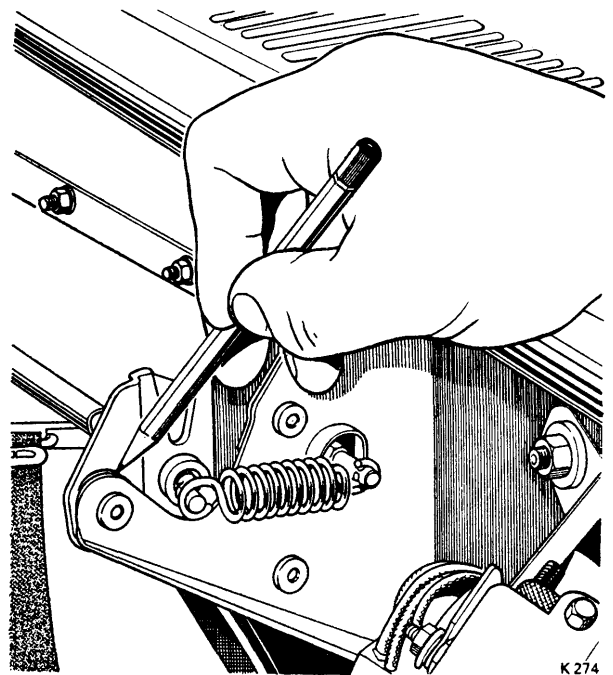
SCRIBING A LINE ON THE BONNET CATCH MECHANISM TO FACILITATE ASSEMBLY
